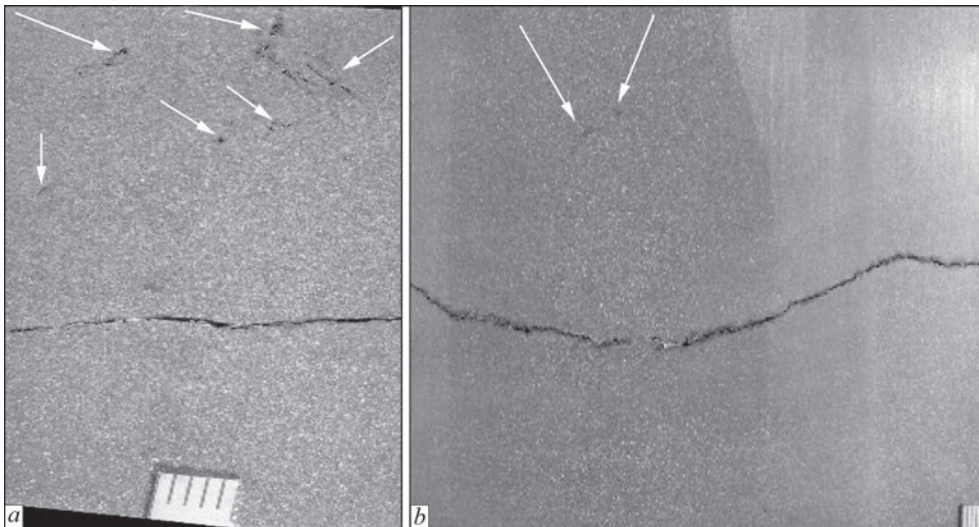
Macrostructure of welded butt joints C1 (a) and C2 (b) in the crack zone (arrows mark accumulation of gas pores)
